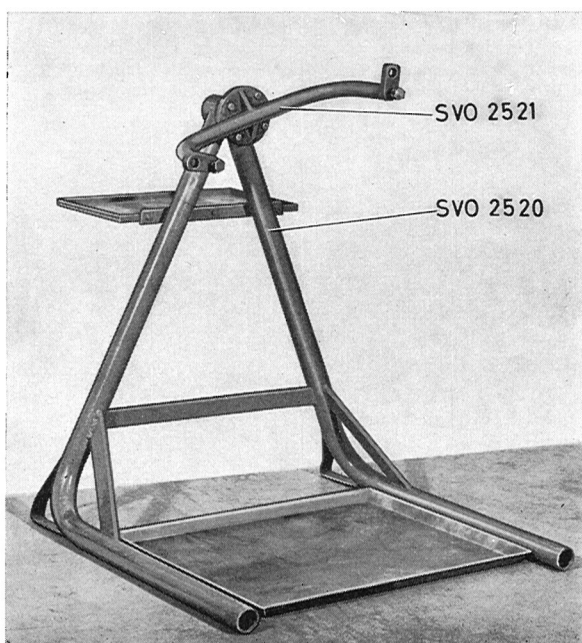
Stand 2520 and fixture 2521 for engine
